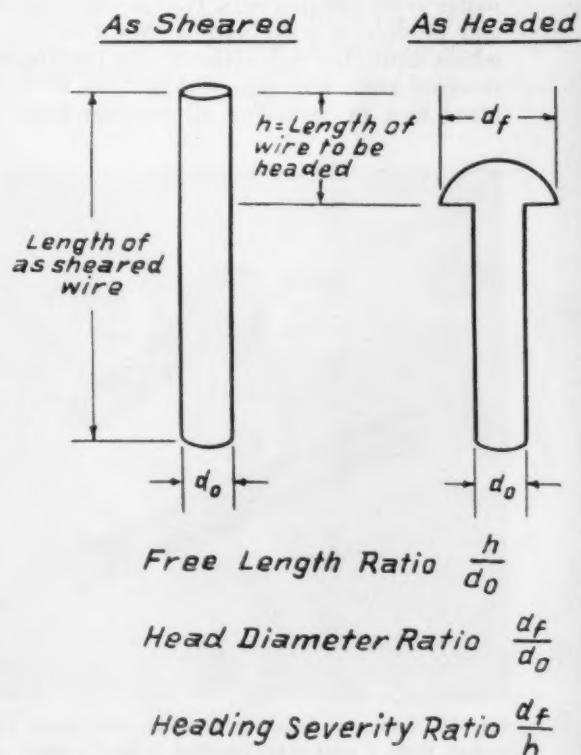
Definition of three parameters important to the design of cold-headed parts and the tooling used.
